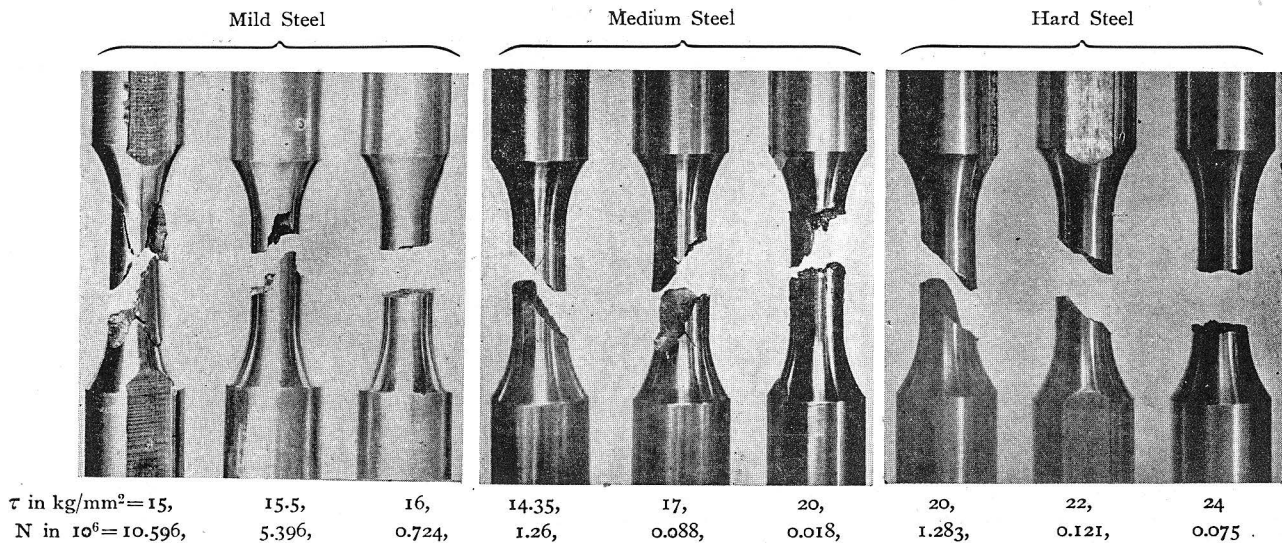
Torsional Fatigue Fractures of Carbon Steels at Various Shear Stresses.
